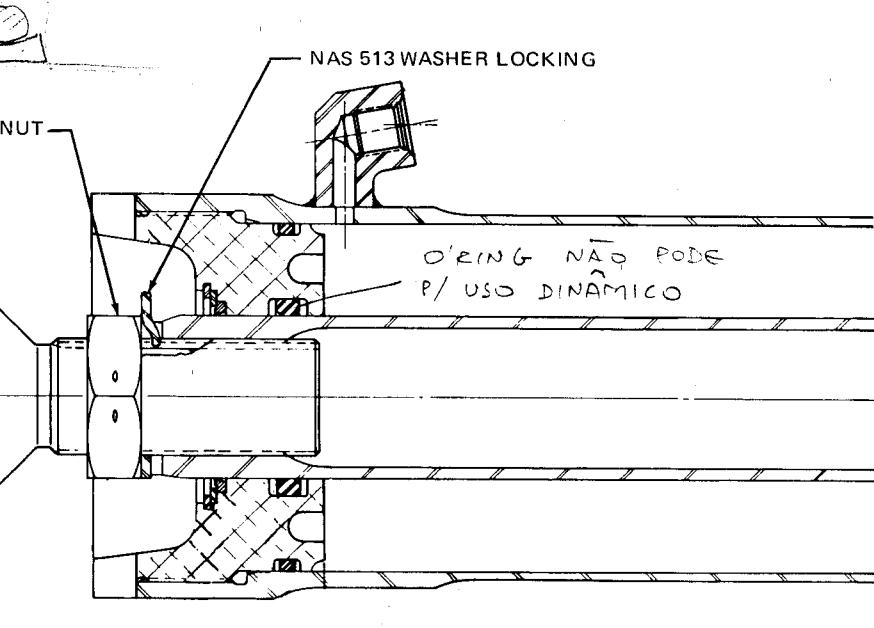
NOSE GEAR RETRACT CYLINDER
